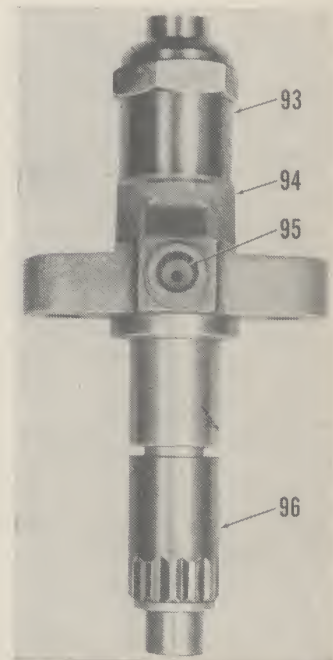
Bosch closed pintle type fuel nozzle as used on 6 cylinder Super 99 Diesel.
